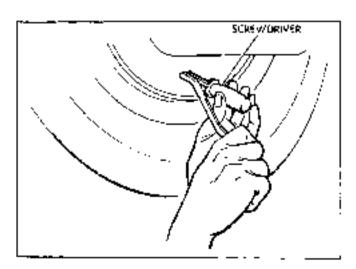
Preparing to Sock Off Adjusting Screw
